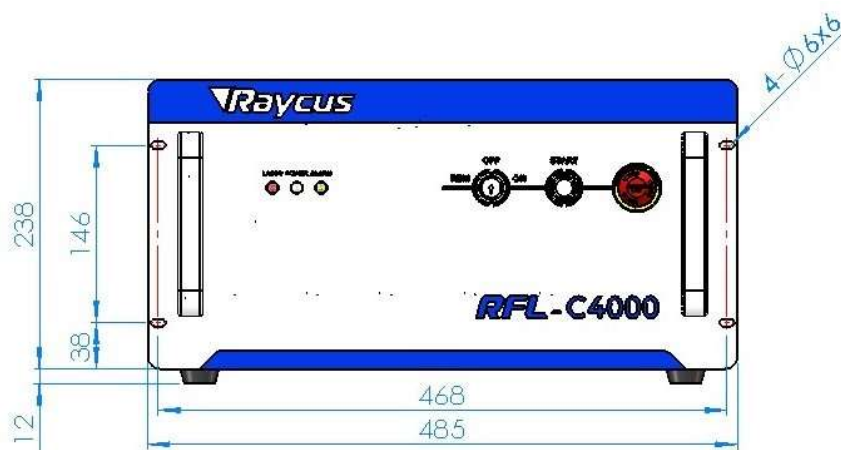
(a) Front panel view of RFL-C4000S (unit: mm)
